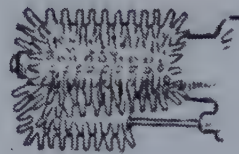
The Old Style Knox "Porcupine" System of Air Cooling
